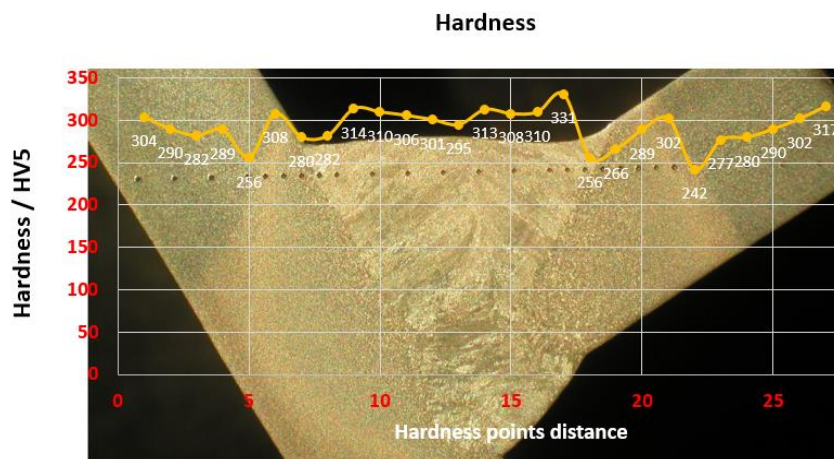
Hardness test of specimen welded with 0.79 kJ/mm heat input.
